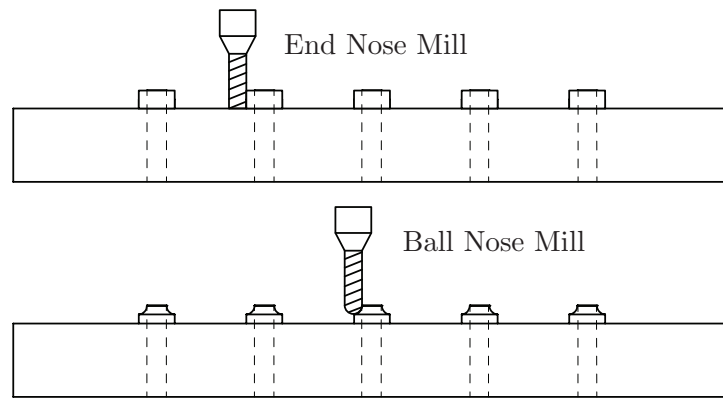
Milling the capillary tubes for design D7 and D9. For design D9, the LTCC is fastened in a specifically designed aluminum clamp, to fix the two laminated parts containing the metallic filaments.
